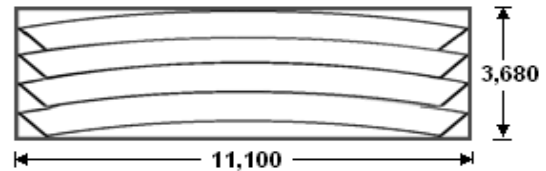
Stiffeners in the one original rectangular 9 % Ni steel plate.
